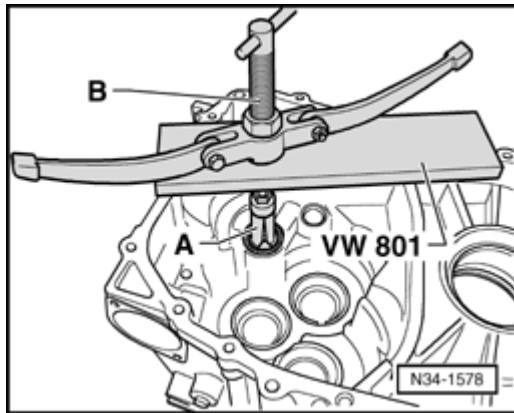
Pulling reverse shaft needle bearing out of transmission housing
